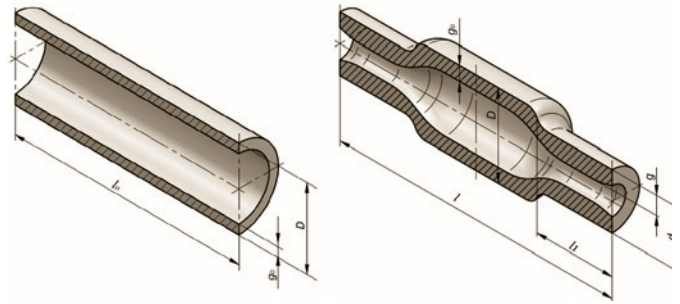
Shape and dimensions of the billet used in rotary compression – a) and of the formed part with two extreme journals – b)
